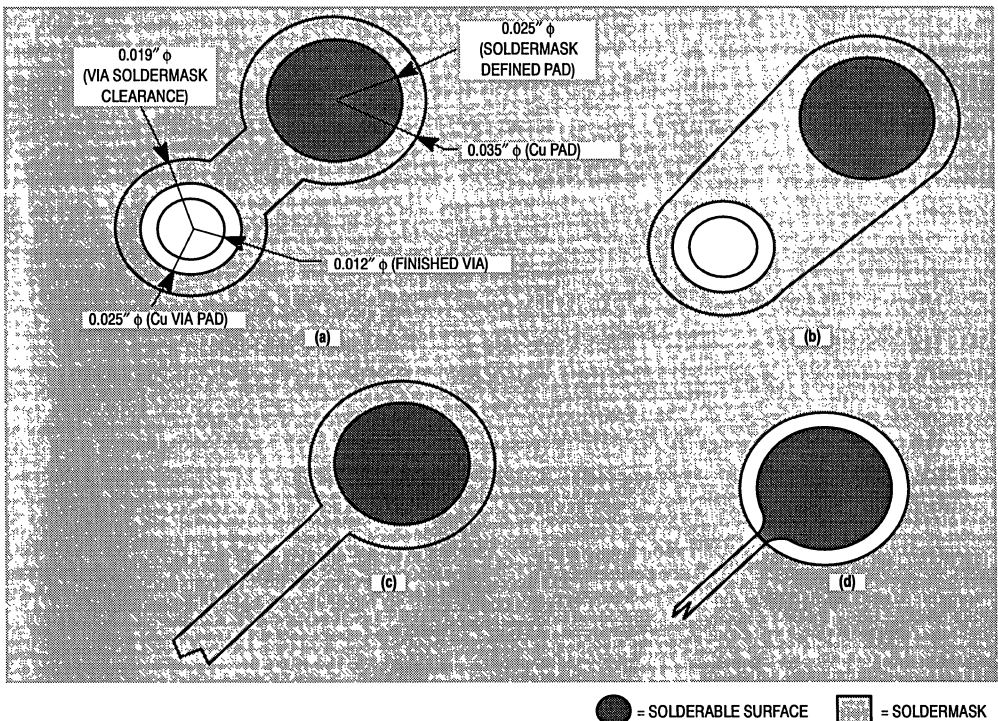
Pad Options for PBGA Motherboard Routing: a) Dumbbell pad shown with typical dimensions, b) Teardrop, c) No integral via for escaping onto top layer, d) PBGA version of standard surface mount pad with soldermask clearance around the solder pad.
